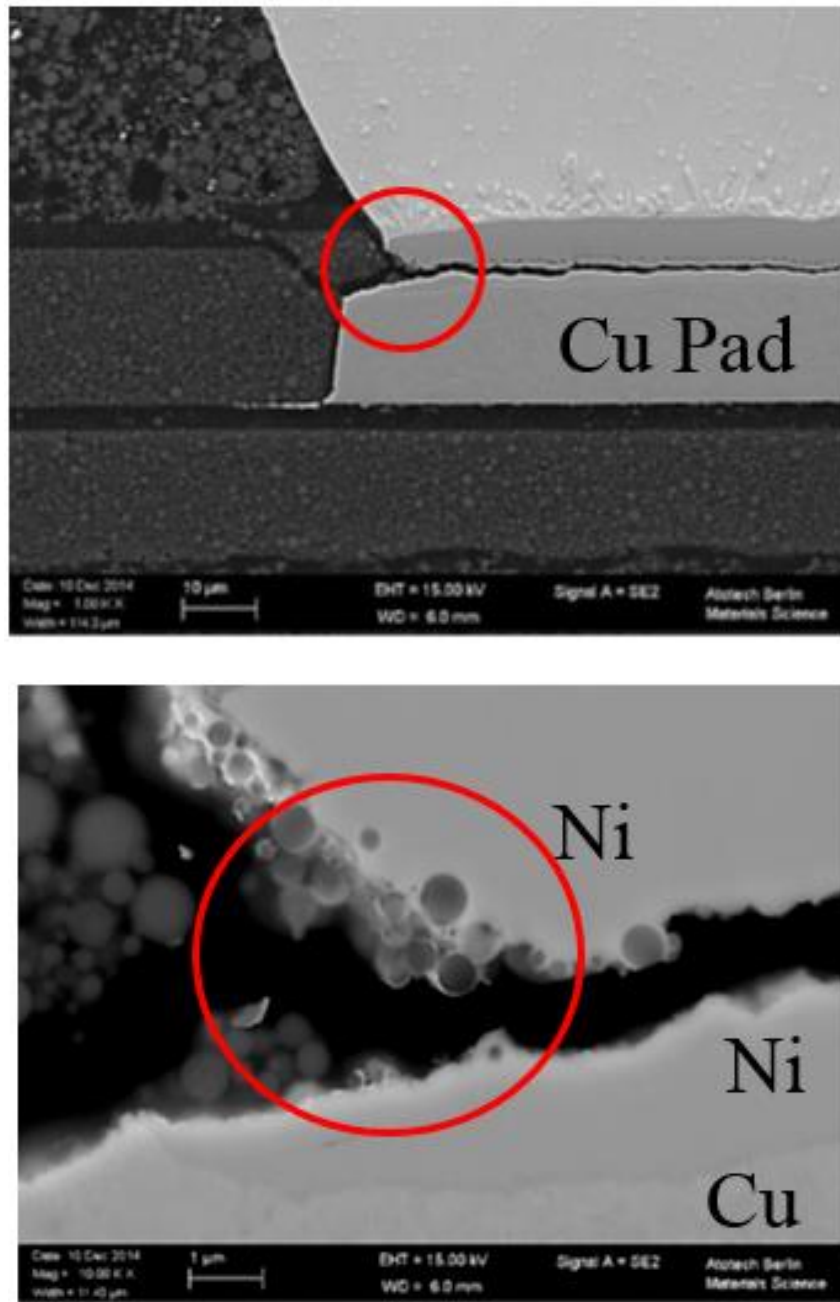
Necking at pad edge tip (top), magnified view of fillers (bottom) indicating some ZIF residue on the copper pad. (Images courtesy of Atotech.)
